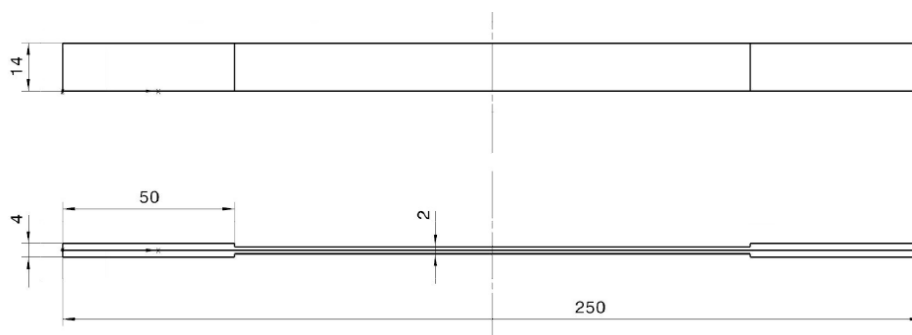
Dimensions of the tensile test specimens by *Suer 2018* [2, p. 33]
